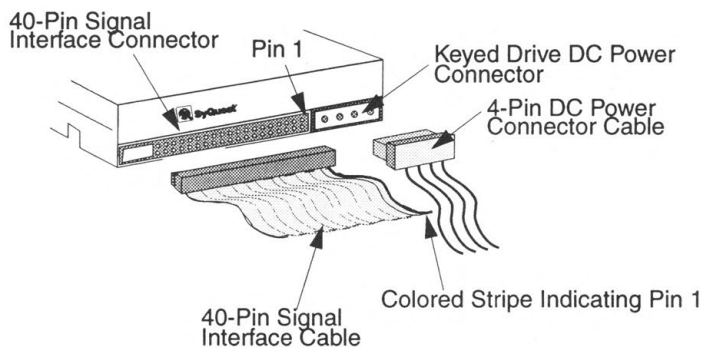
Close-up View of Cables Connected to the EZ135 Drive
